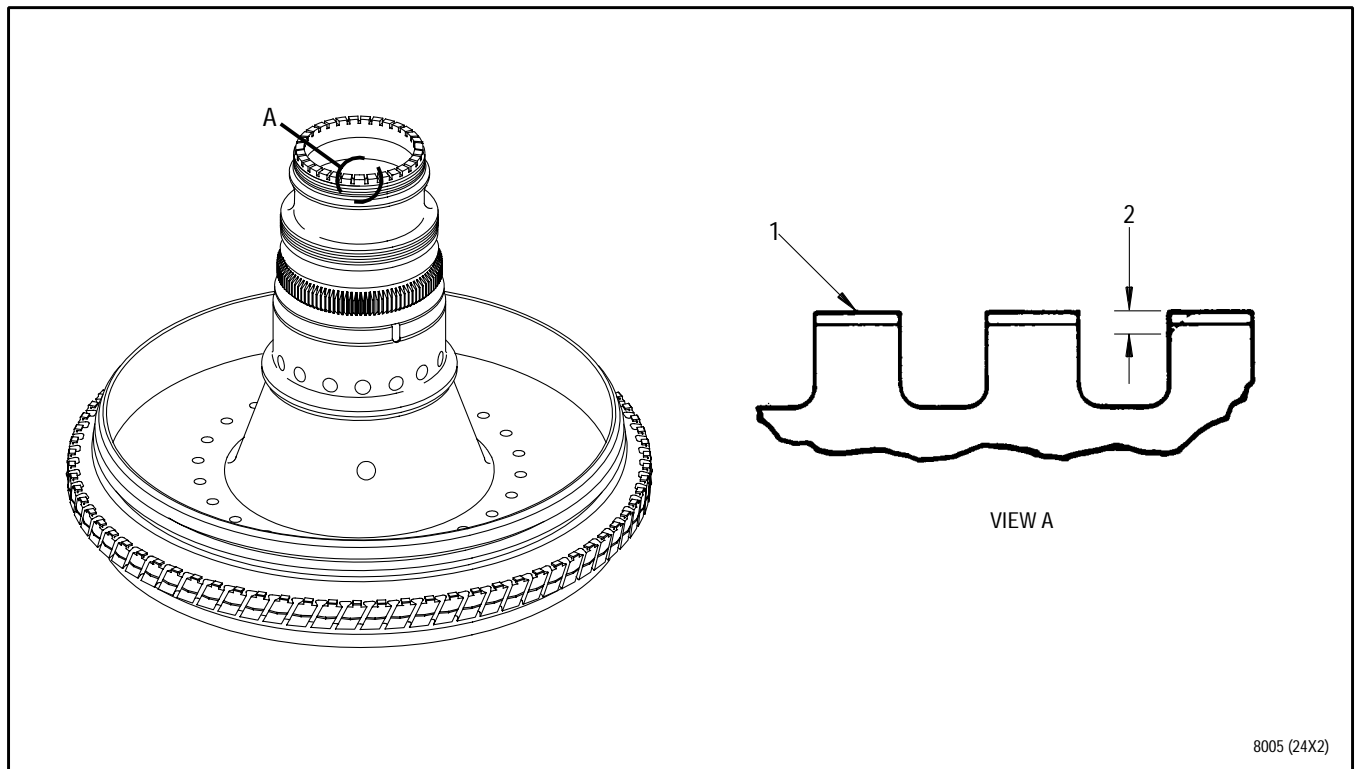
A. Sixth Stage Compressor Disk and Hub Assembly - Knife-Edge Blending
